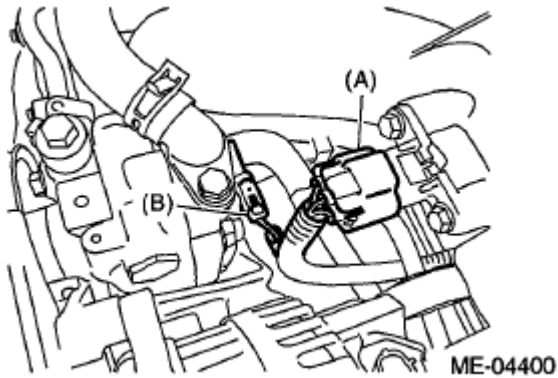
Identifying Manifold Absolute Pressure Sensor Connector
